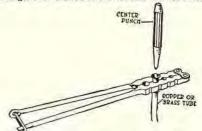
Flanging copper tubing: Copper tubing may be readily flared for the attachment of unions by the use of a pair of lineman's splicing pliers. The end of the tube to be flanged is caught in the jaw of the pliers and a punch is used to press the end out to the extent required. Ordinarily some one of the grooves in the pliers will be found to fit almost any of the copper tubing commonly used. When this is not the case, the grooves may be readily enlarged by an emery wheel.
